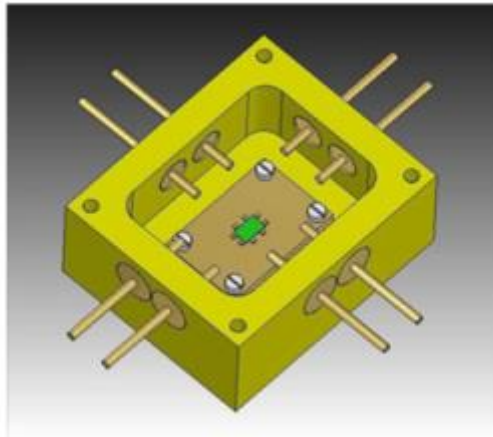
Assembly of PA MMIC into the aluminium jig
